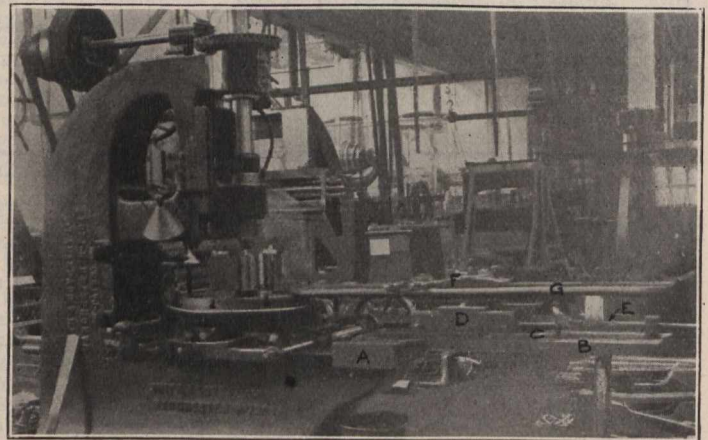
Vertical Miller Attachment for Milling Radius Link.
